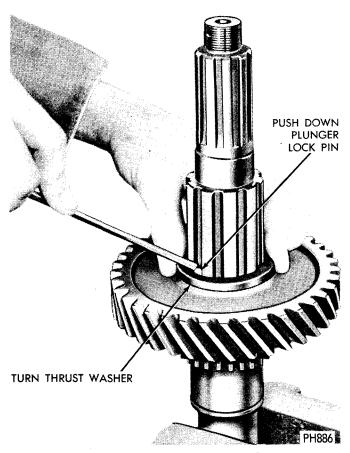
Removing Second Speed Gear Thrust Washer (540 Mainshaft)
